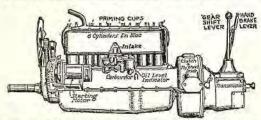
Left side or carburetion side. The inlet pipe passes between the cylinders to the valve side.
